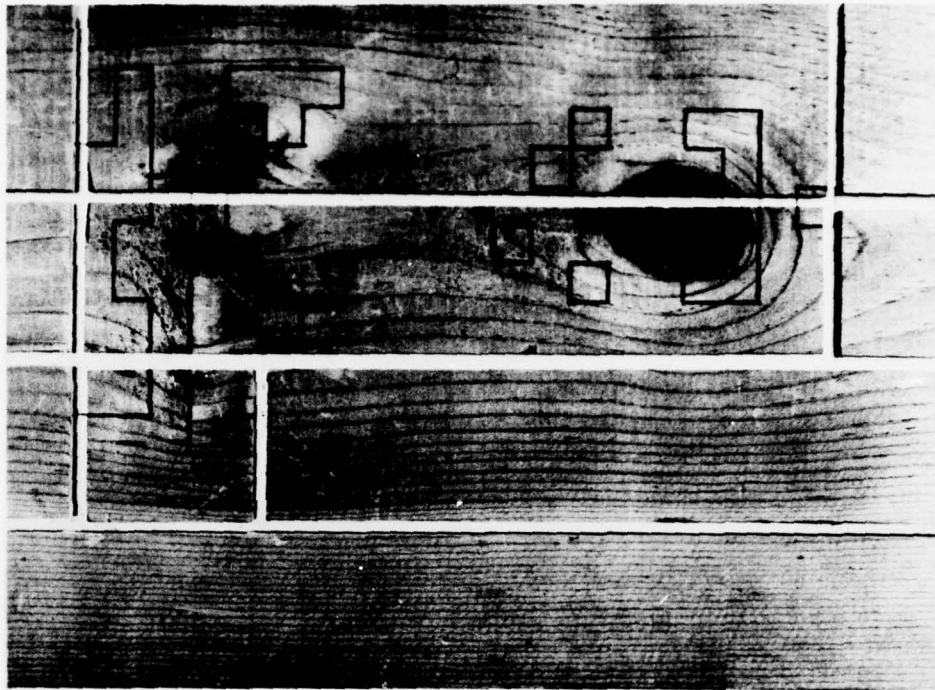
Closeup of defects removed after making a sawing decision with the computer after defects were located. Board from figure 13.
